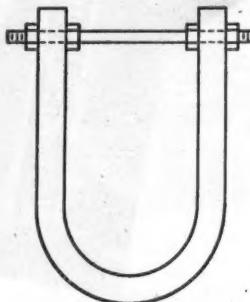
A "spacer" can be used to hold the ends of a piece so that they will be properly spaced when quenched.
